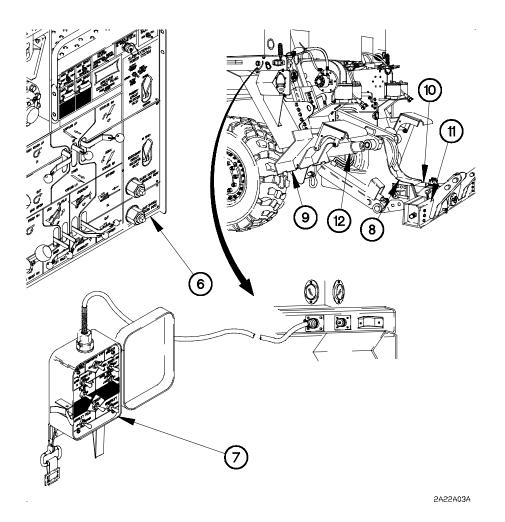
Material Handling Crane (MHC), 30K Winches, and Underlift Assembly (Cont)
